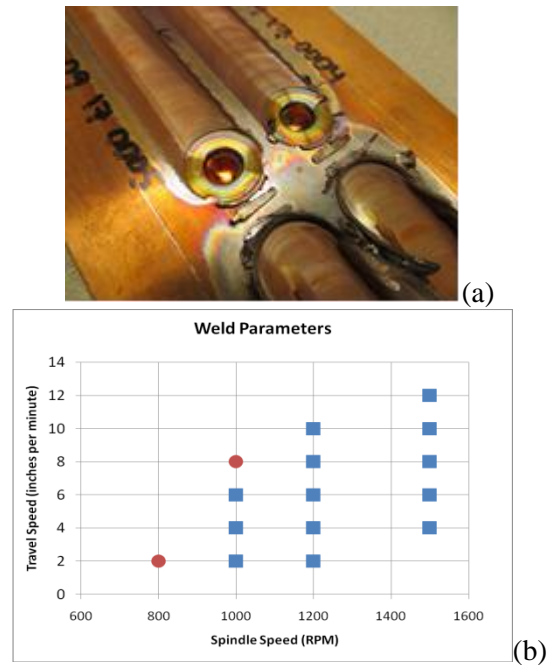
(a) Typical FSW weld in C101 Cu and (b) Cu FSW parameter map using a FerroTic stepped spiral tool. Circle symbols indicate failed welds and square symbols indicate conditions where the visual observation of the weld surface passed a set of criteria.
